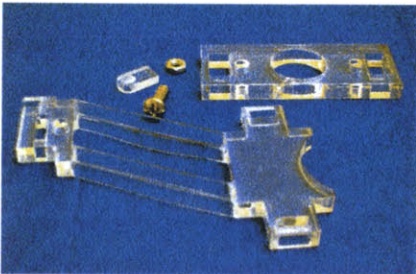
Component pieces used in forming a right-angle joint from planar parts.
